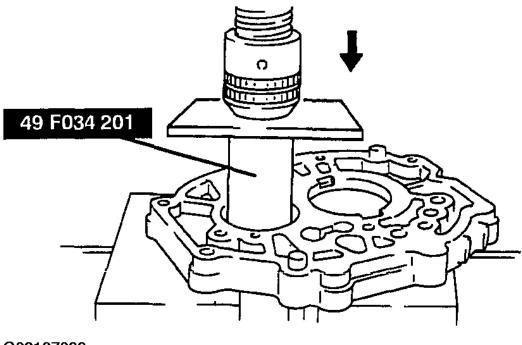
Removing Mainshaft Front Bearing Courtesy of MAZDA MOTORS CORP.
